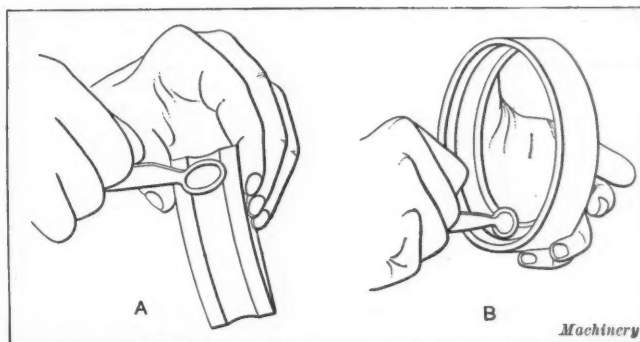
Use of Templet for inspecting Raceways in Outer and Inner Ball Bearing Rings
